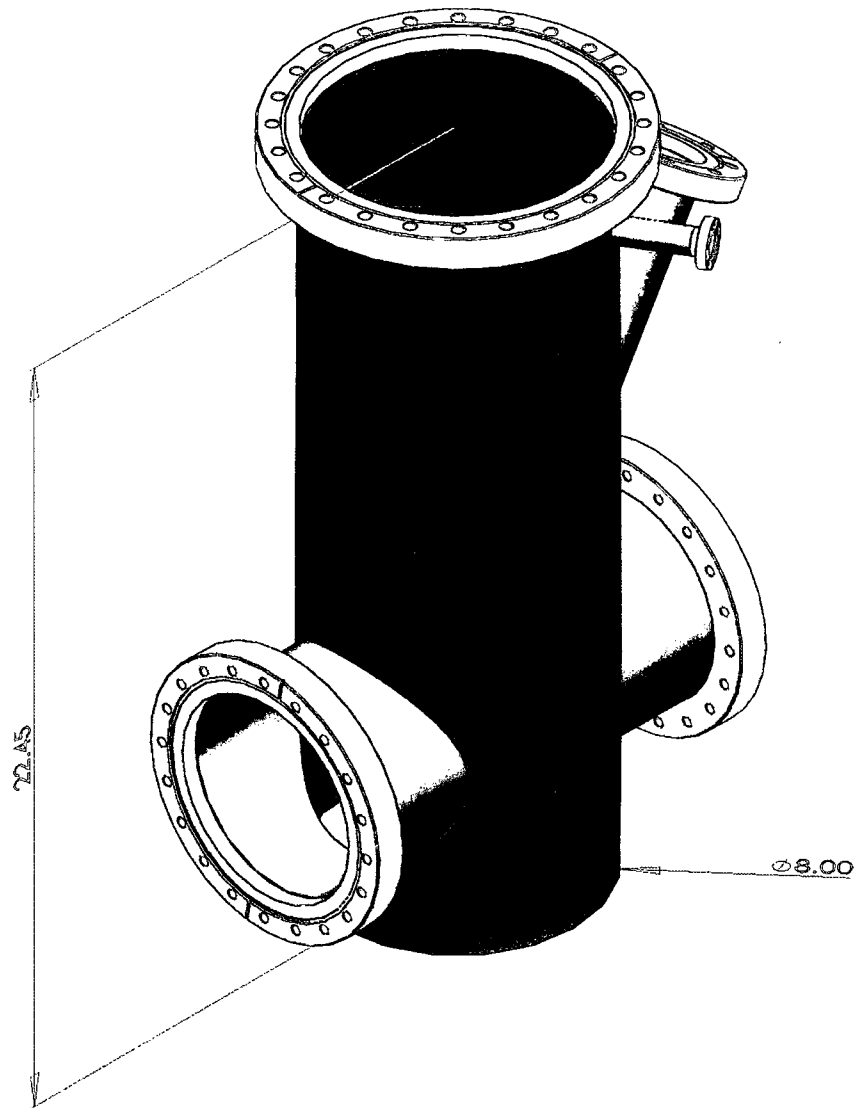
Steel vessel with pre-welded conflat flanges used for the furnace's vacuum vessel.
